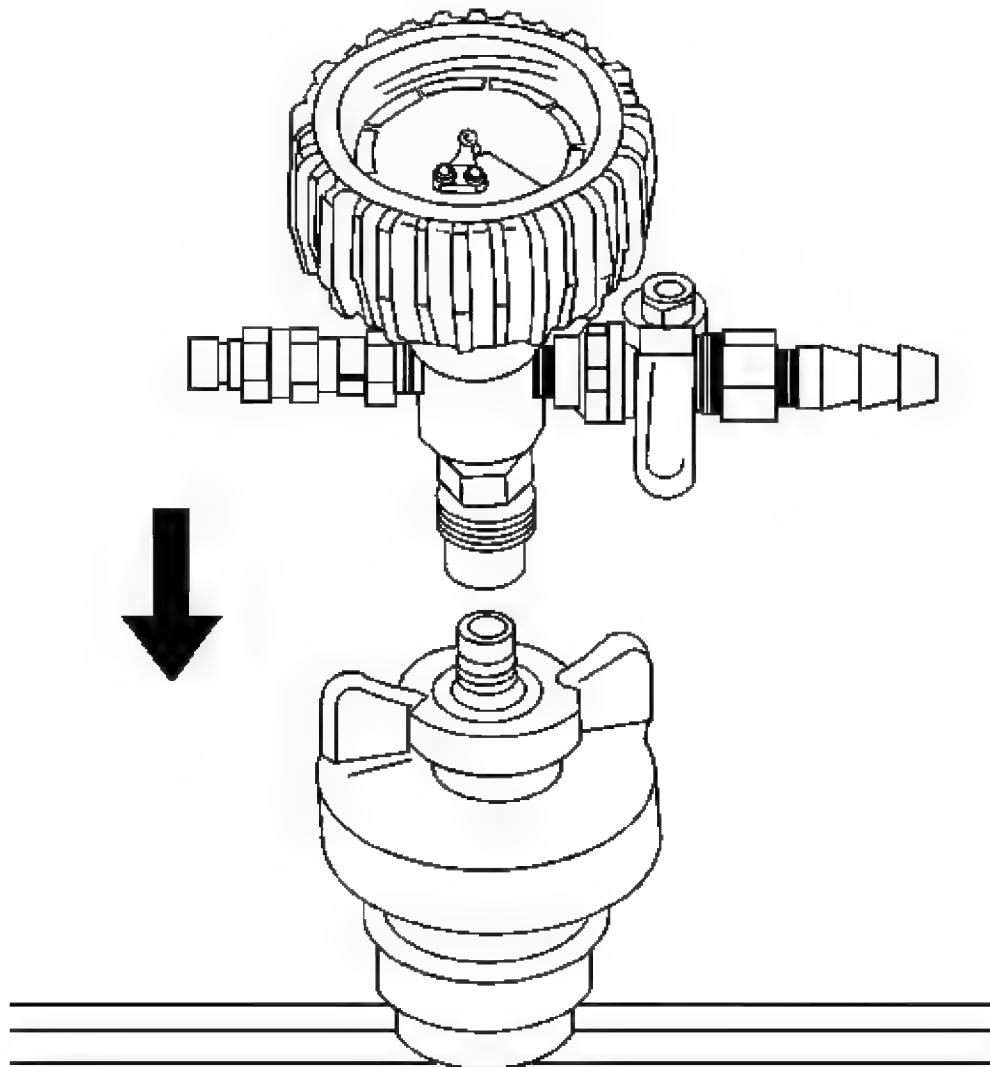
Attaching The Vacuum Gage Assembly To The Vac N Fill Cap
